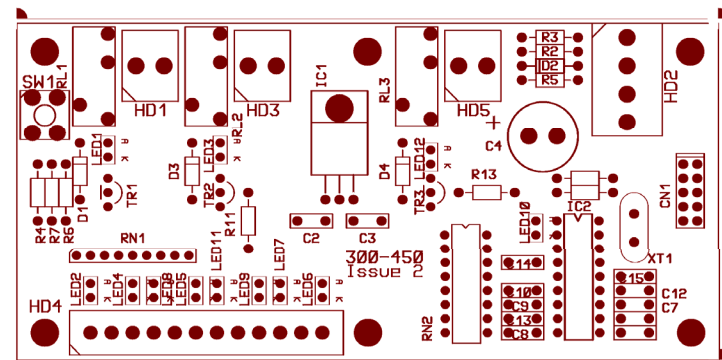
MIC-ALM 8 Input Alarm Card PCB Layout
